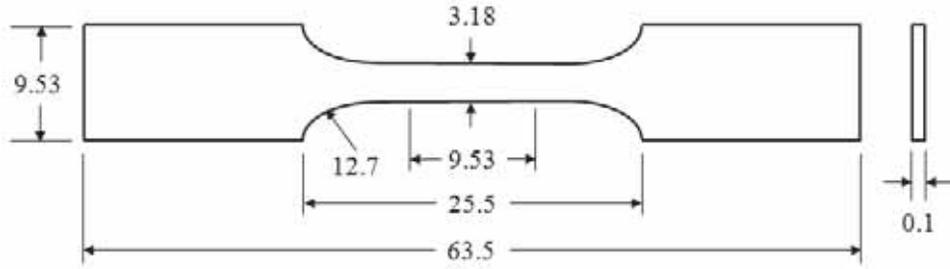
Dimensional profile of ASTM tensile specimens. (Unit: mm)
